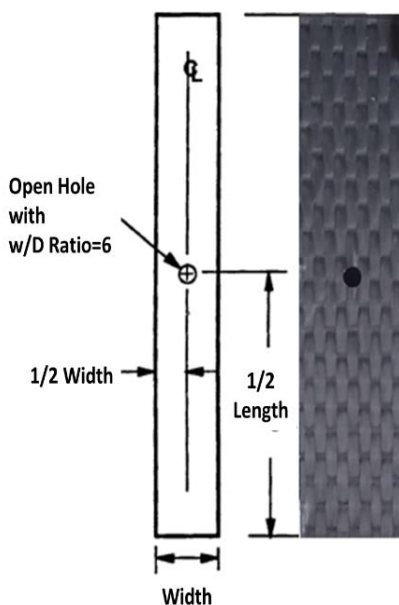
The specimens dimensions with ASTM D5766 standard [15].
